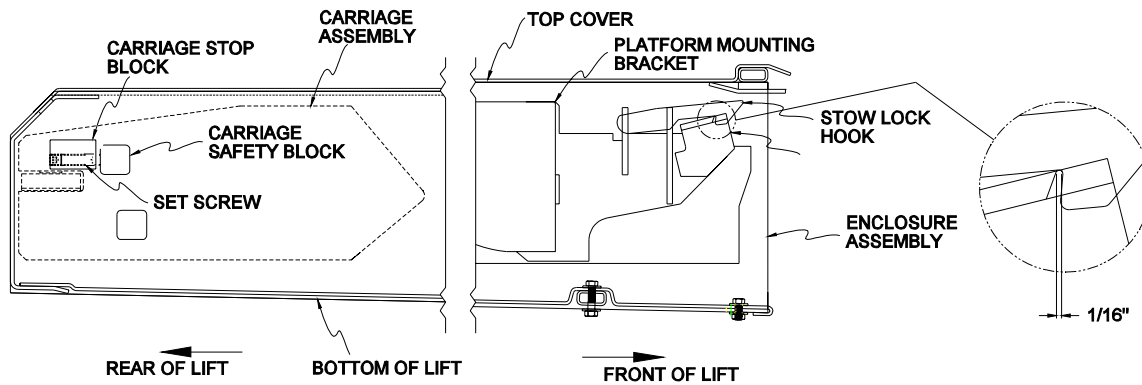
DEPLOY LOCK ADJUSTMENT
